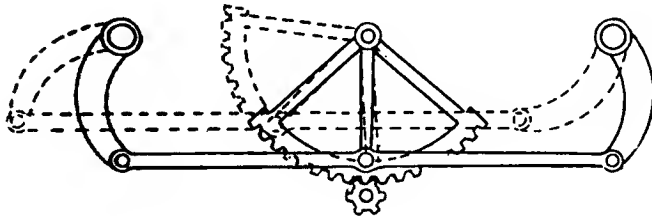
Diagram of rack-and-pinion type of steering gear used on Pecqueur steam cars in 1828, showing the use of steering arms and cross-tie rod, the same as employed in steering at the present time
